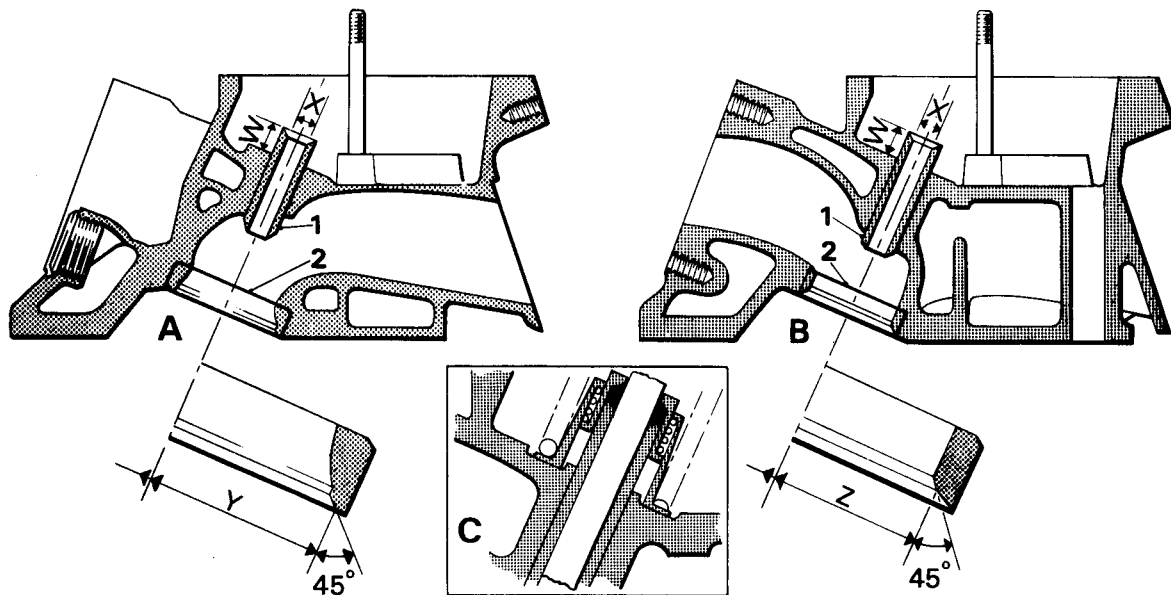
INLET AND EXHAUST VALVE GUIDE AND SEAT DIMENSIONS
